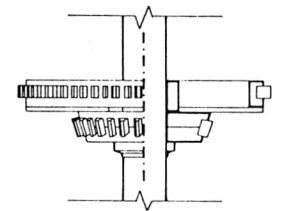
Coed Trewernau Mill. Pit wheel (all wood except straps).
